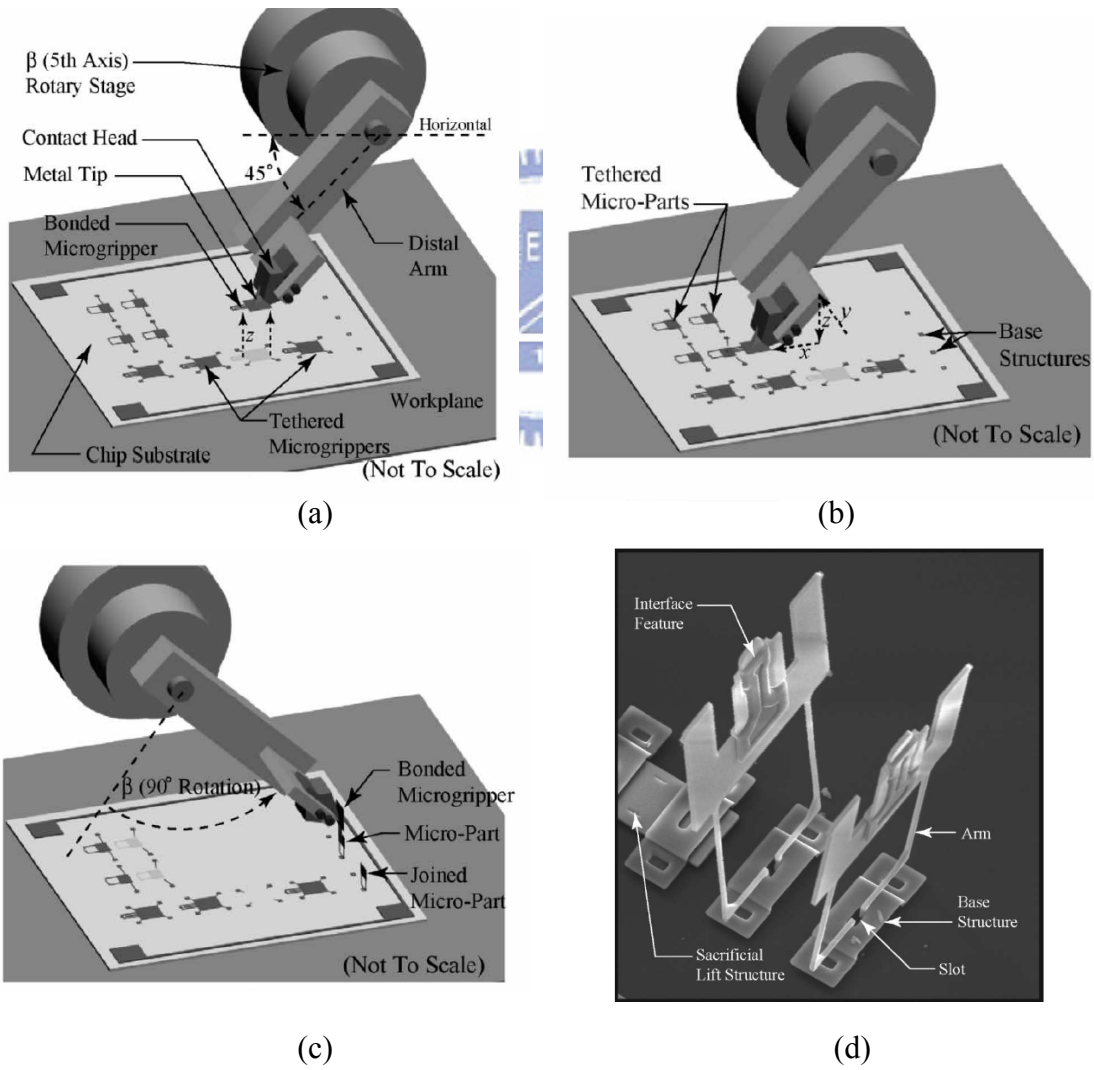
Assembly process, (a) bonded microgripper grasps micro-part, (b) move the micro-part to the place of assembly, (c) insert the micro-part into the slot, (d) out-of-plane 3-D microassembly [19].
